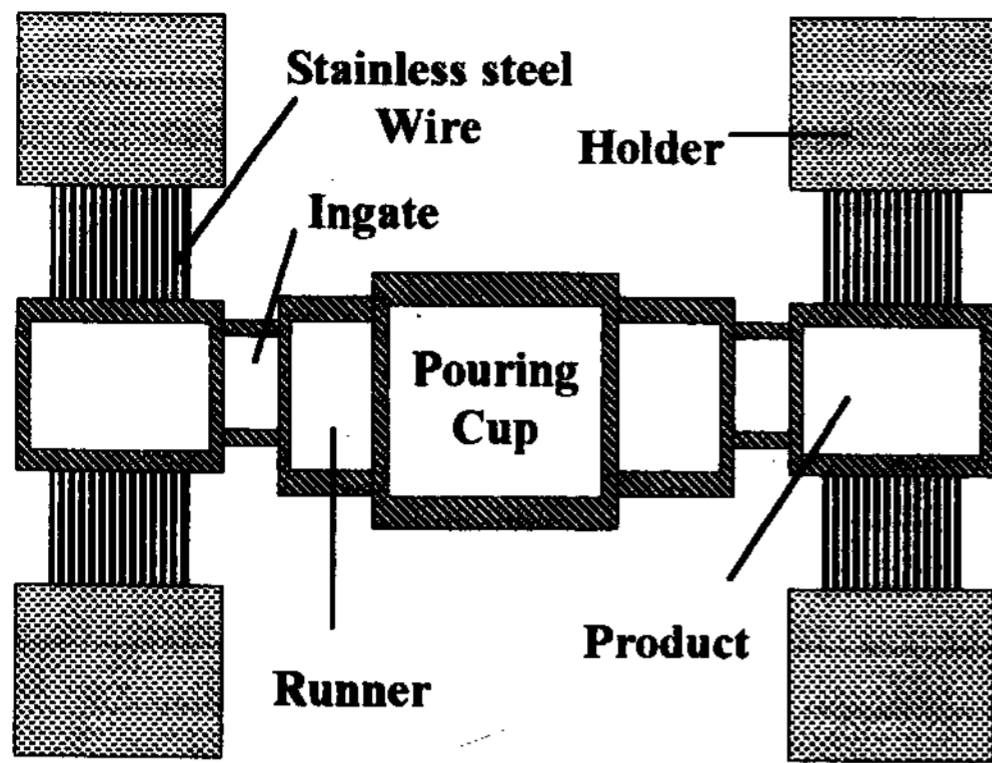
Mold design for manufacturing of Al/stainless steel wire composite.
